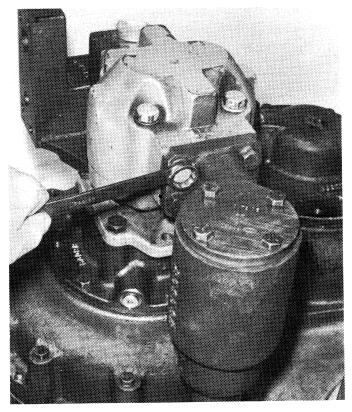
Removing or Installing Pump Suction Strainer Assembly.
